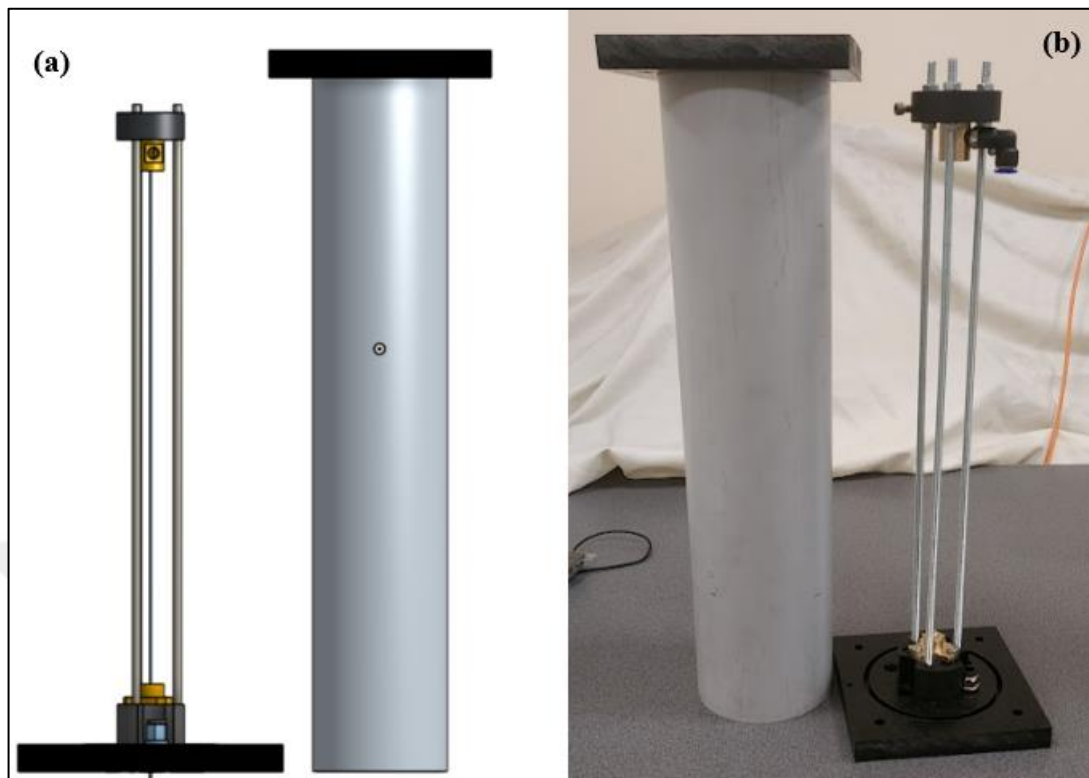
(a) 3D CAD design, (b) manufactured design
